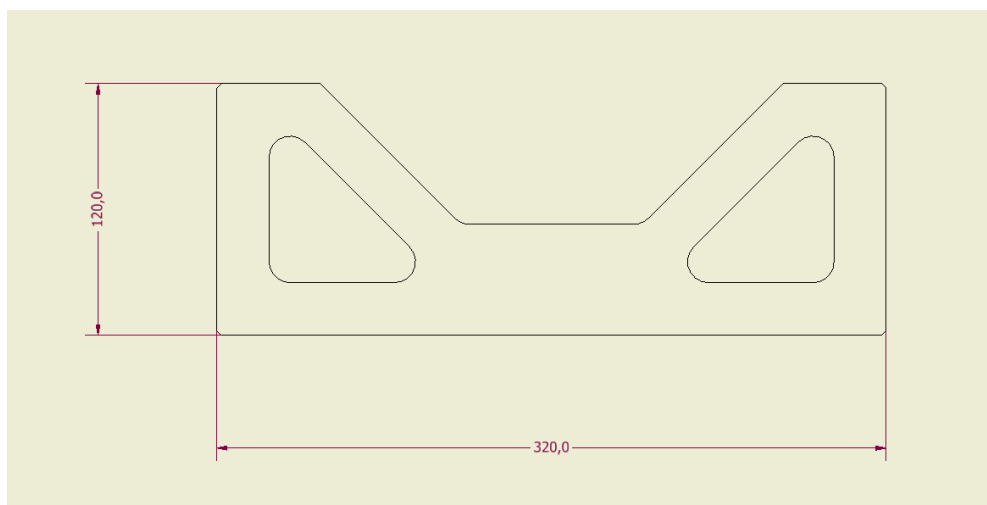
Support bracket key dimensions. Material 12mm 5080 aluminium alloy tooling plate
